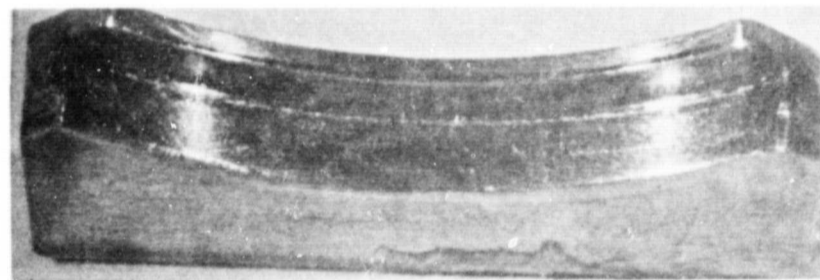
Sliding Wear Specimens and Chrome-Plated Mating Surfaces
